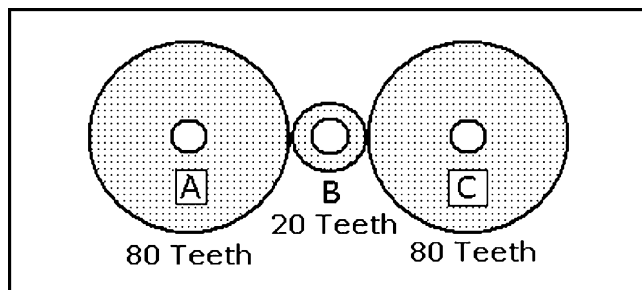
Gear train: When gear A turns once clockwise, gear B turns four times counter clockwise, and gear wheel C turns once clockwise. Gear B reverses the direction of gear C so that both gears A and C turn in the same direction with no change in the speed of gear C.
